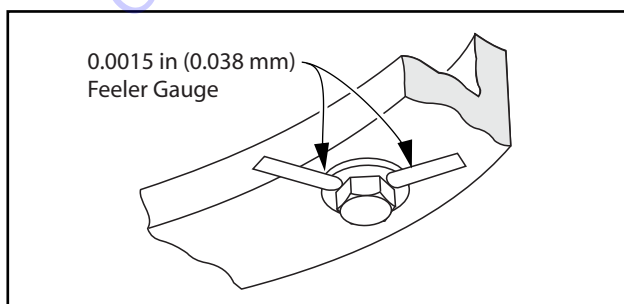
Frame Side Bearing Bolt Feeler Gauge Check
